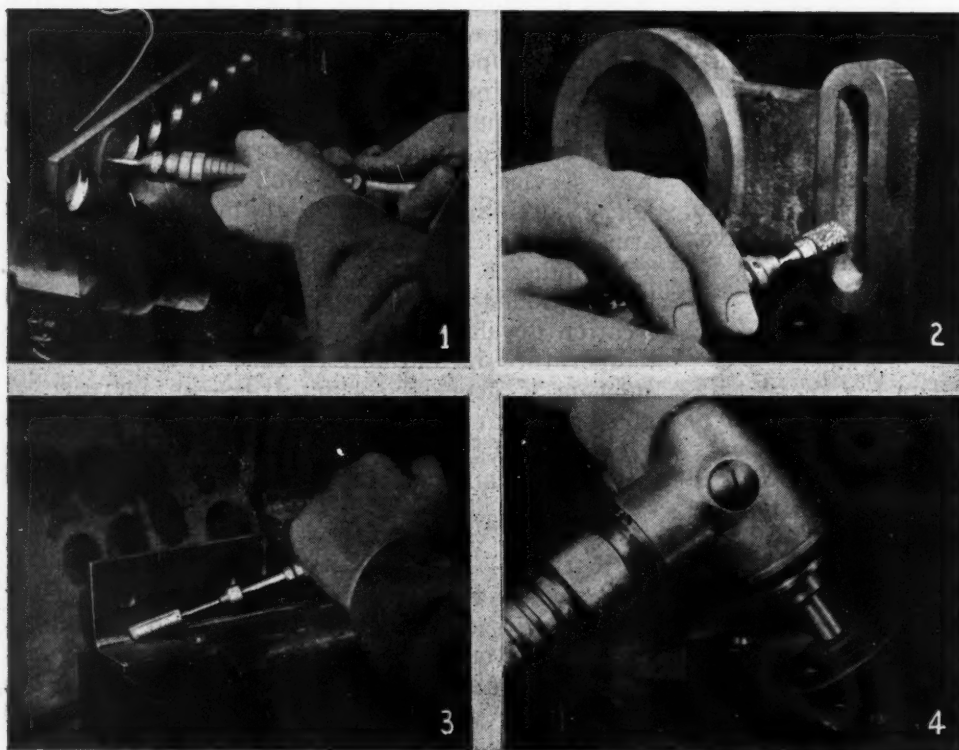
Slotted Abrasive Disks Provide a Rapid Means of Finishing the Edges and Walls of Holes in Metal Parts. Fig. 2. A Rubber Expanding Mandrel Fitted with an Abrasive Cloth "Spiraband" Makes an Excellent Tool for Burring and Rounding Sharp Edges. Fig. 3. Using an Abrasive Cloth Pencil for Polishing Fillets of Welds. Fig. 4. Rubber Sanding Pad Used for Polishing Drawing Dies
